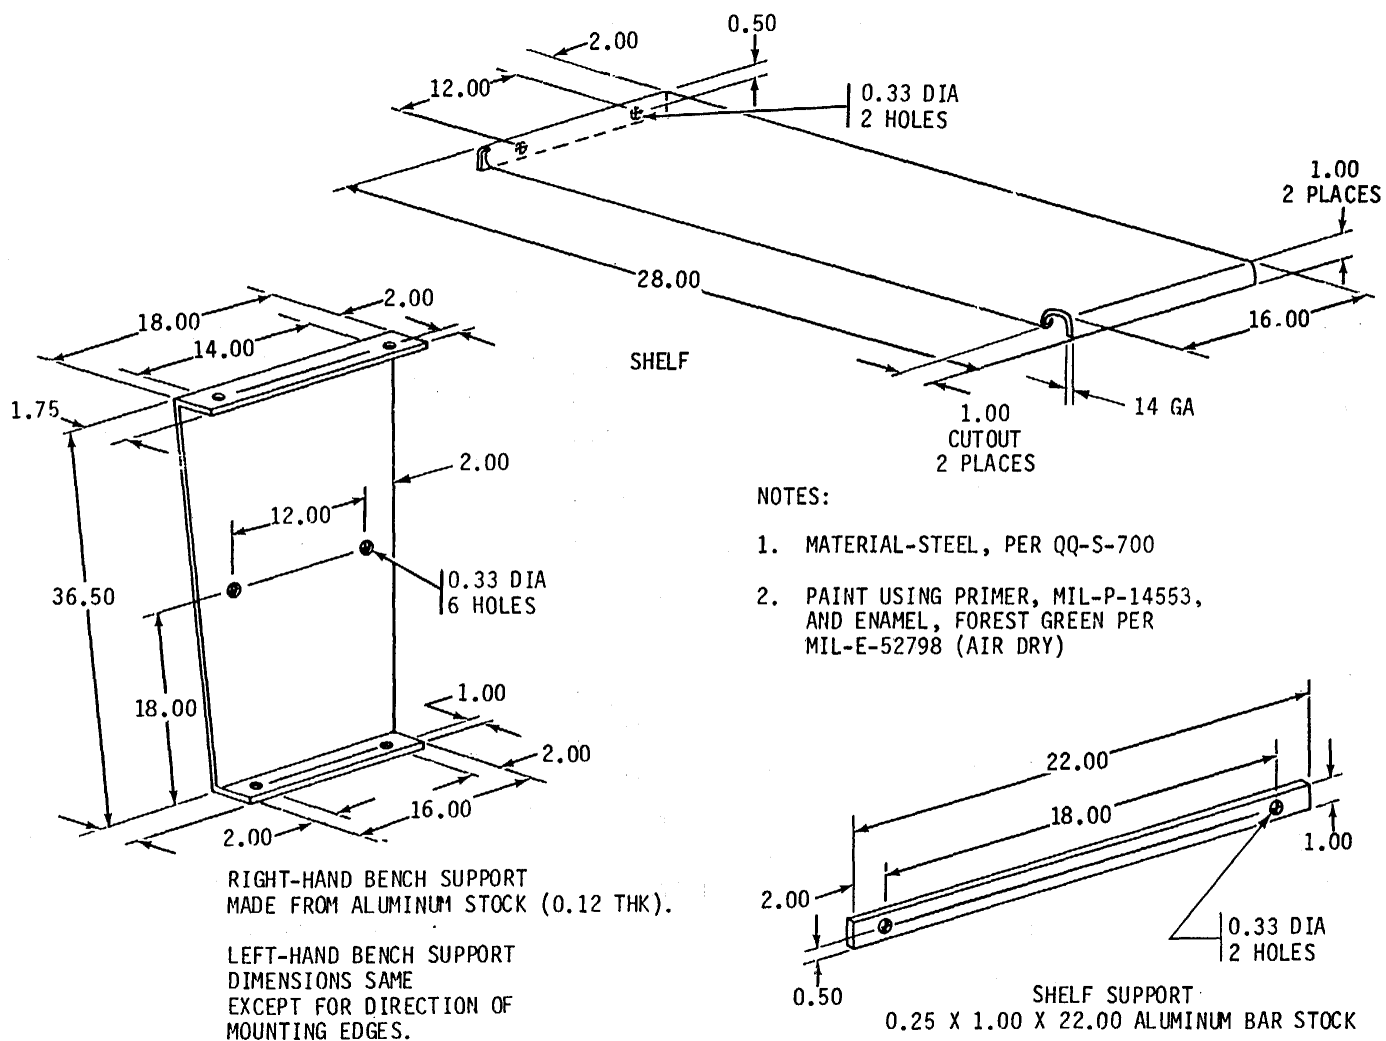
Dimensions for Bench Top, Shelf, and Shelf Support, Unit 1, 280.
